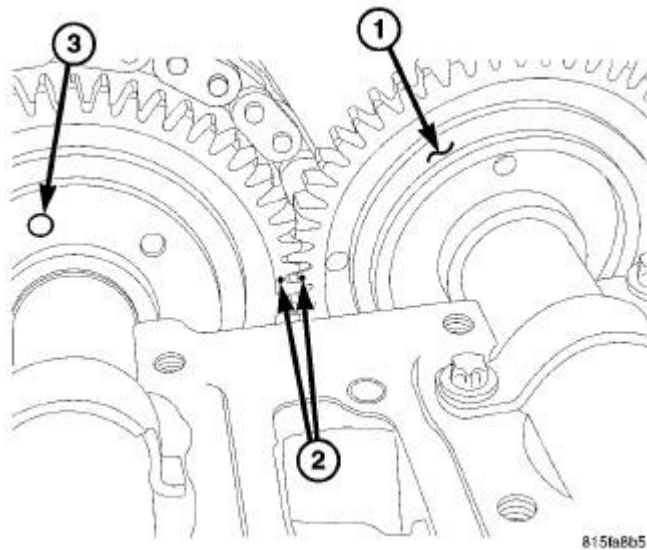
CAMSHAFT GEAR ALIGNMENT
